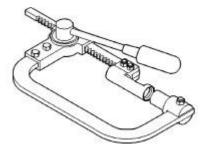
Valve Spring Compressor C-3422-CF Courtesy of CHRYSLER LLC
